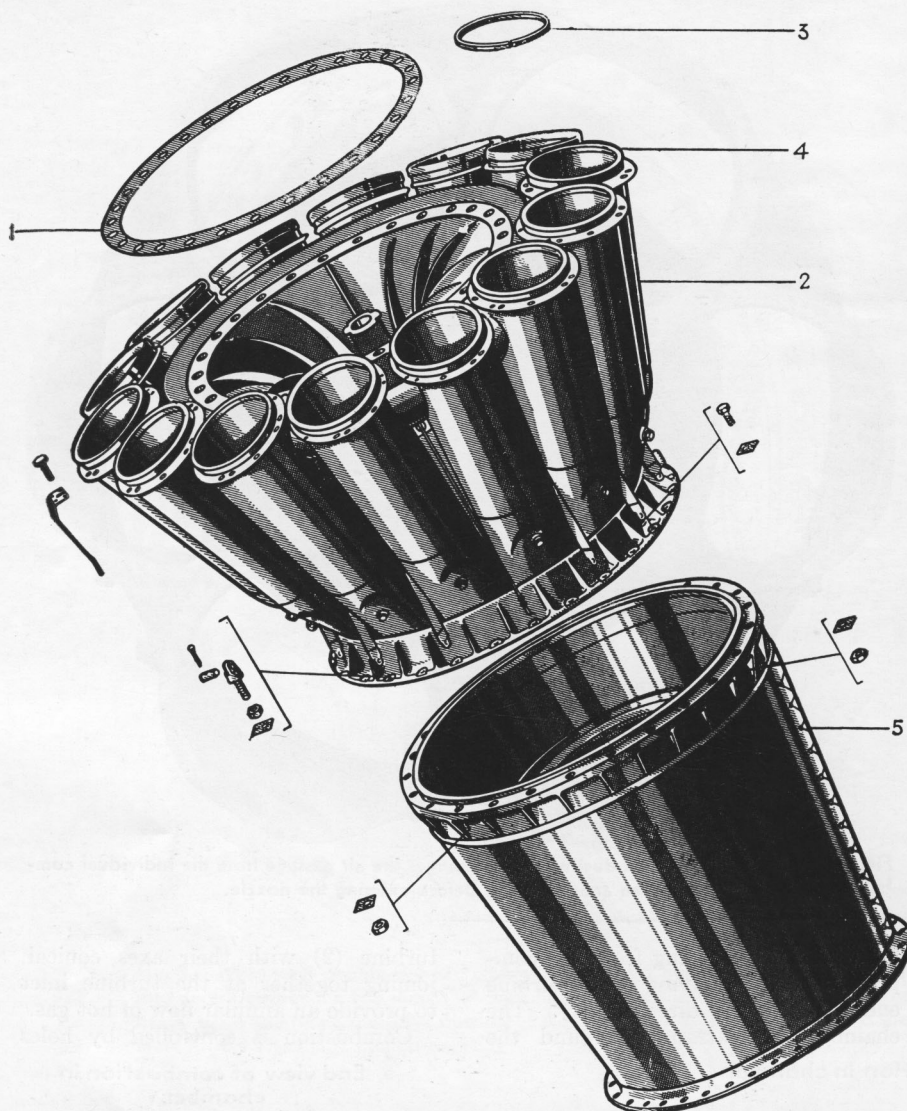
The combustion chambers of the I-40 turbojet, together with the exhaust cone, form the rear section of the basic assembly: (1) bearing support gasket; (2) turbine unit assembly; (3) piston ring; (4) combustion chamber; (5) exhaust cone.
